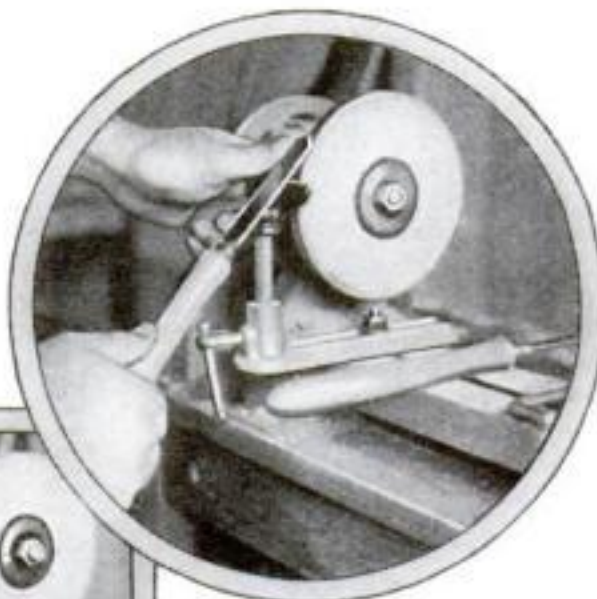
How the diamond-point tool is ground. It has two 30° bevels on the same side, and these meet at the center, coming together at an angle of about 60°. For the exact shape of this and other tools, see the lower drawings of Fig. 8.
